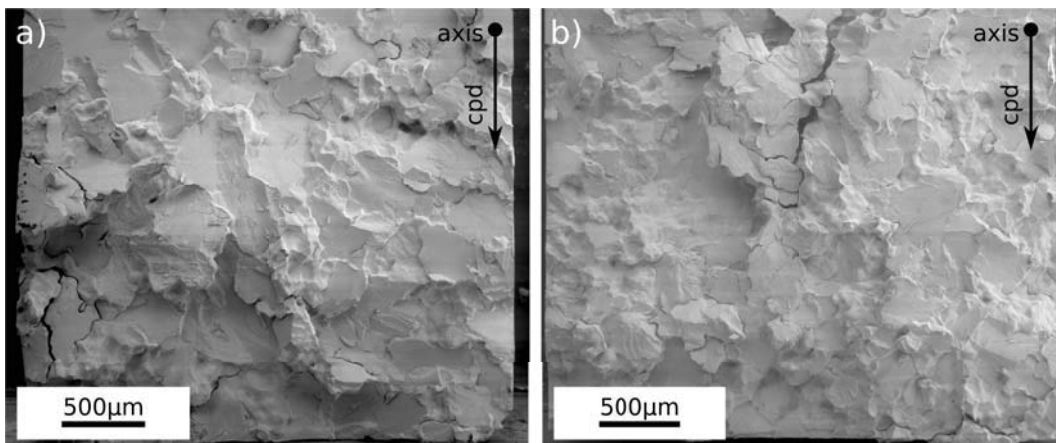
Samples with *C-L*-crack plane orientation manufactured from section 3 after 2% deformation at 350°C. Crack bridges govern the whole crack path, near the notch root (a) and along the propagated crack (b).
